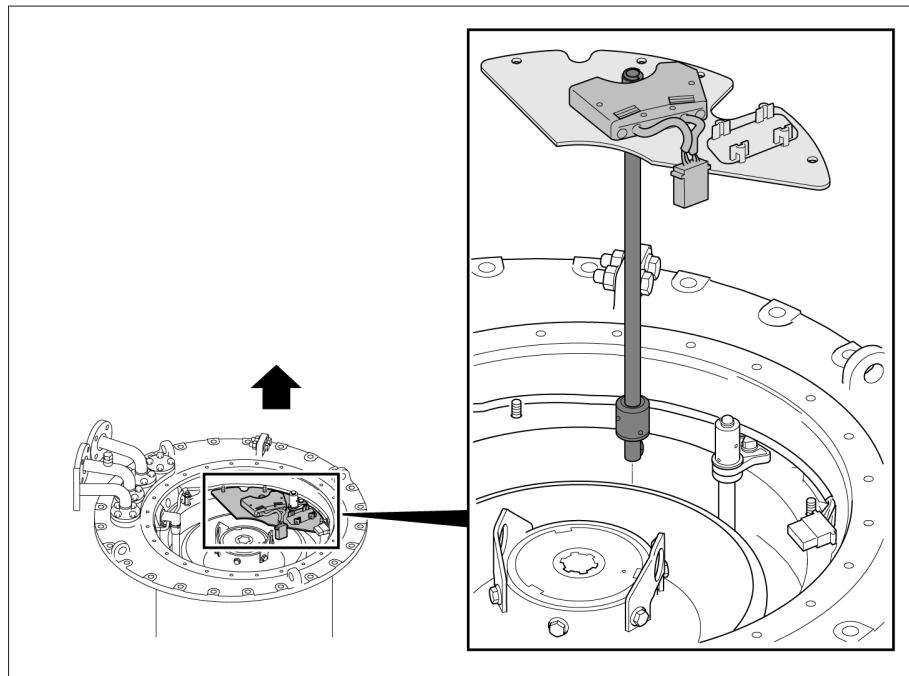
Tap-change supervisory control with mounting plate and drive shaft
